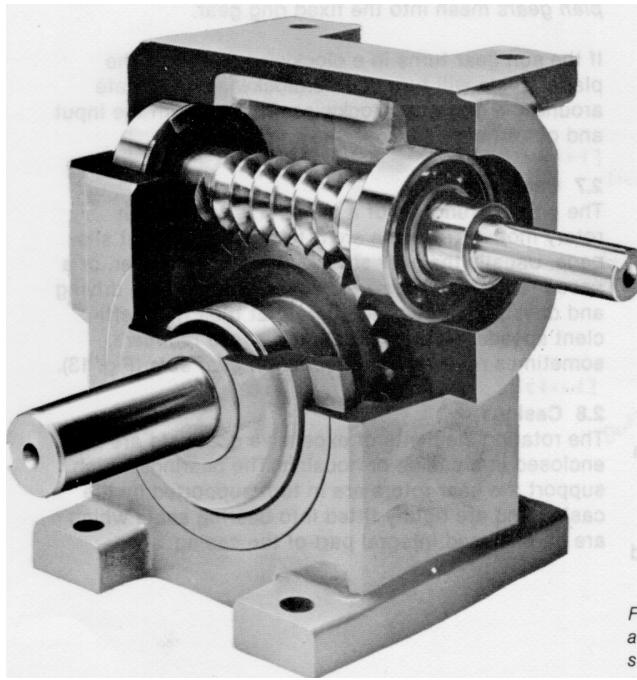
Worm gears. (Winsmith Div., UMC Industries)
